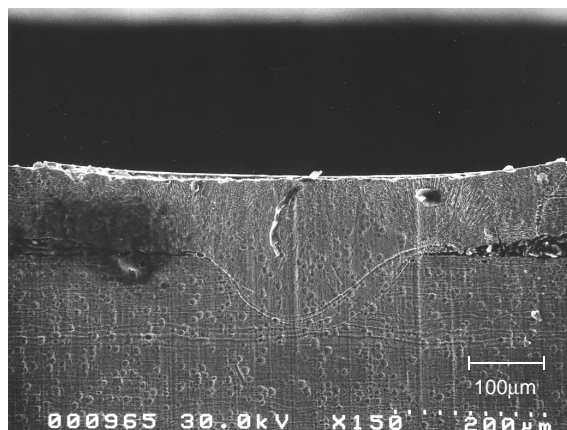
Cross-sectional view of the substrate welded with the laser output of 270V for 10msec (7.8J)
